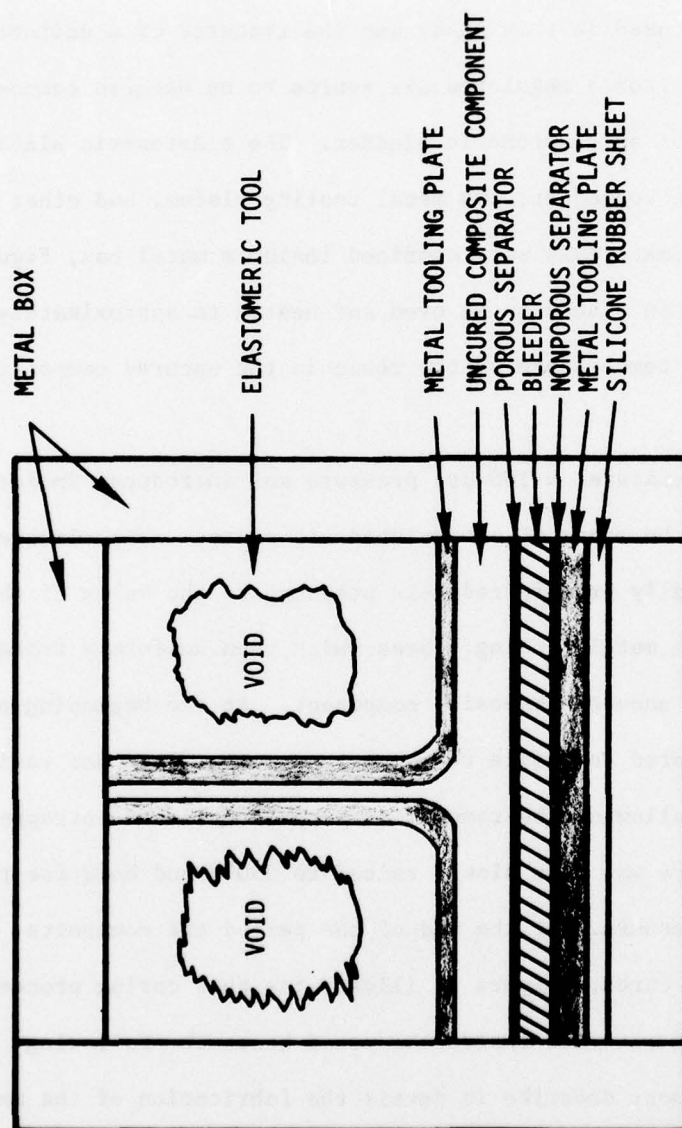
Cross-Sectional Drawing of the Elastomeric Tool
